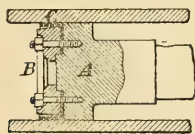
Piston and Cupped Leather for Cylinder of Double-power Hydraulic Crane.—A, Piston. B, Ring with bolts. C, Cupped leather.
